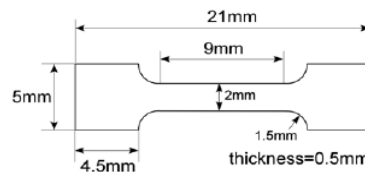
Microtensile specimen of 9 mm gauge [4]
